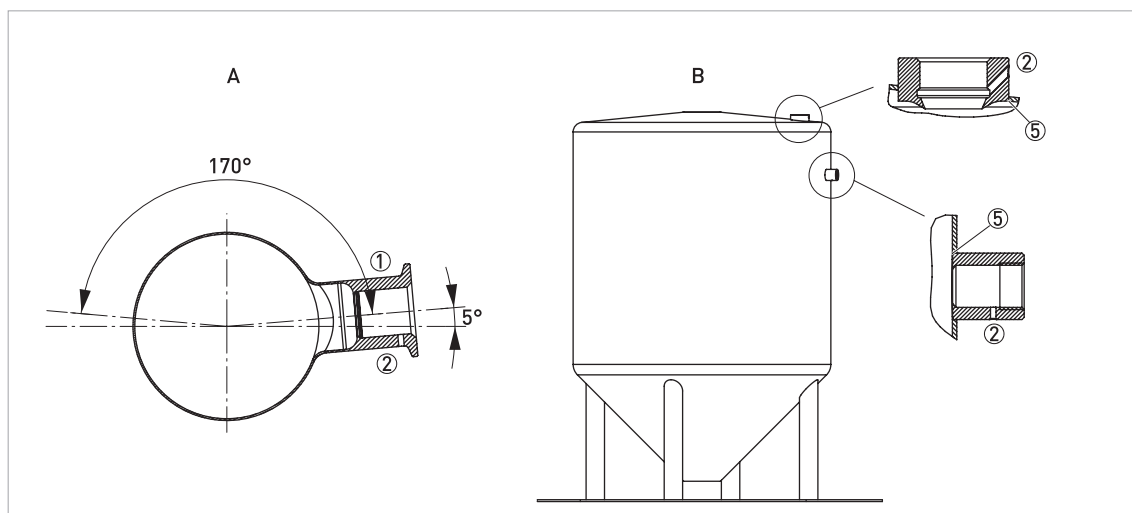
Mounting of 3A products in pipe installations (A) or tank installations (B)
